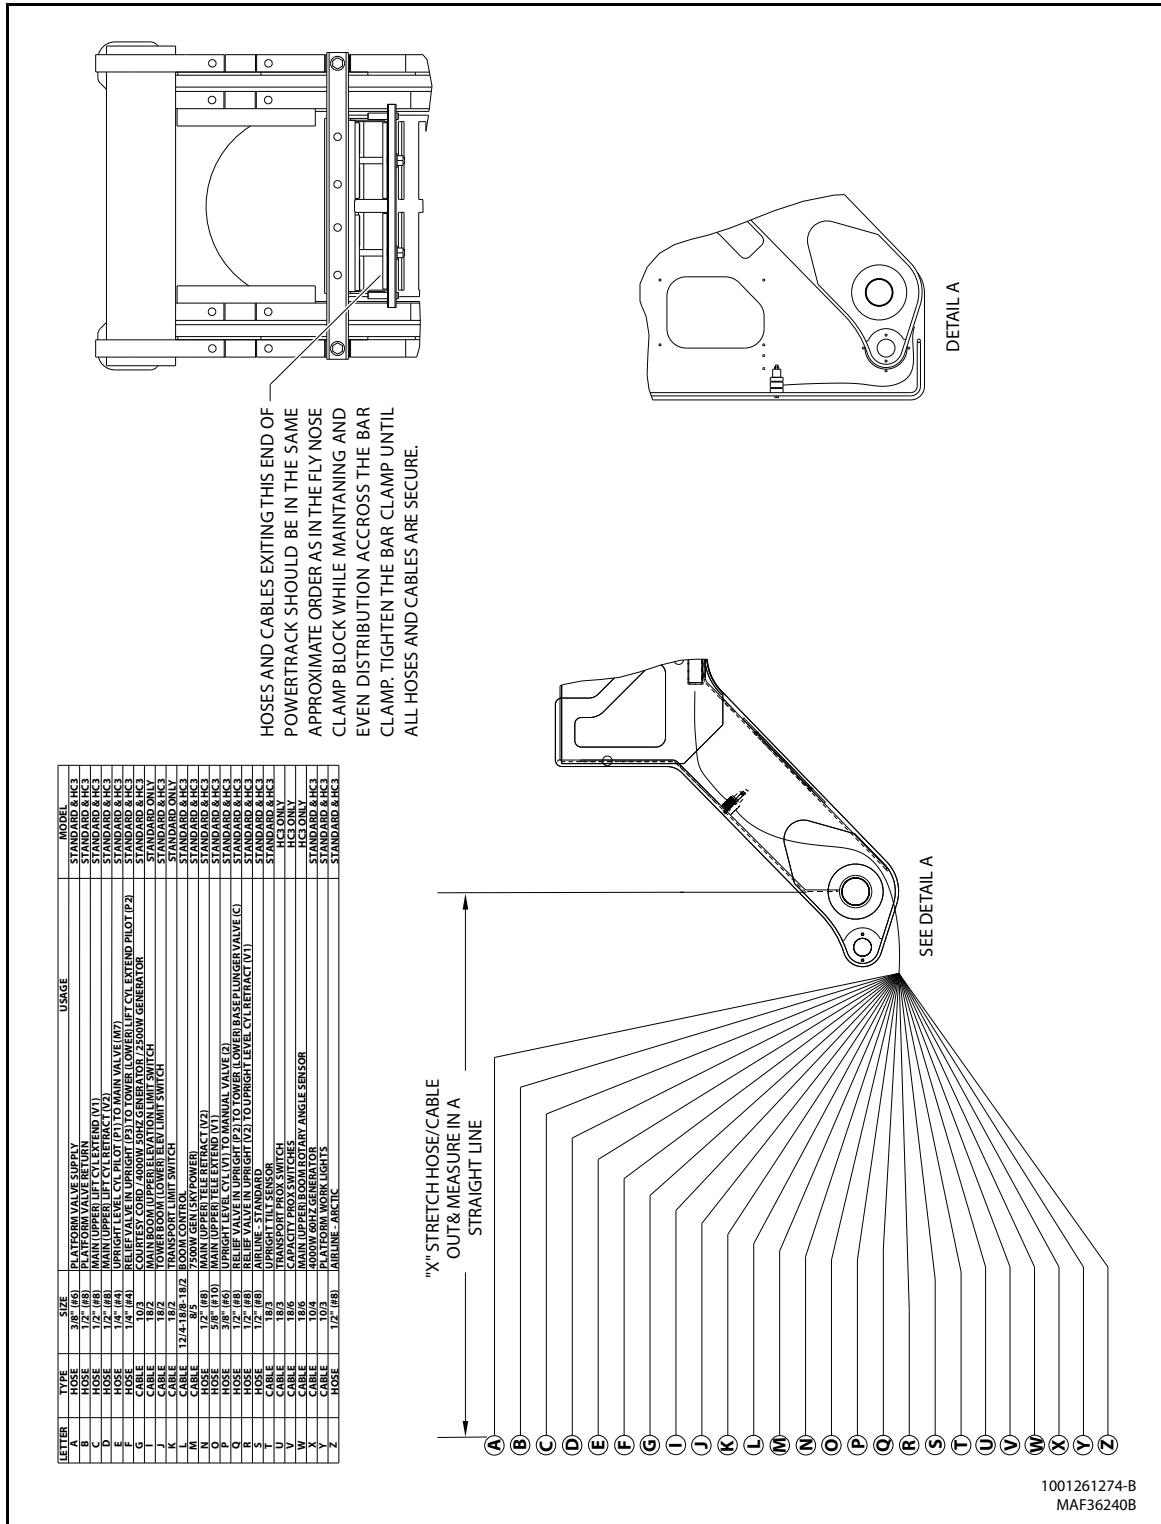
Powertrack Installation Tower Boom - Sheet 3 of 3
